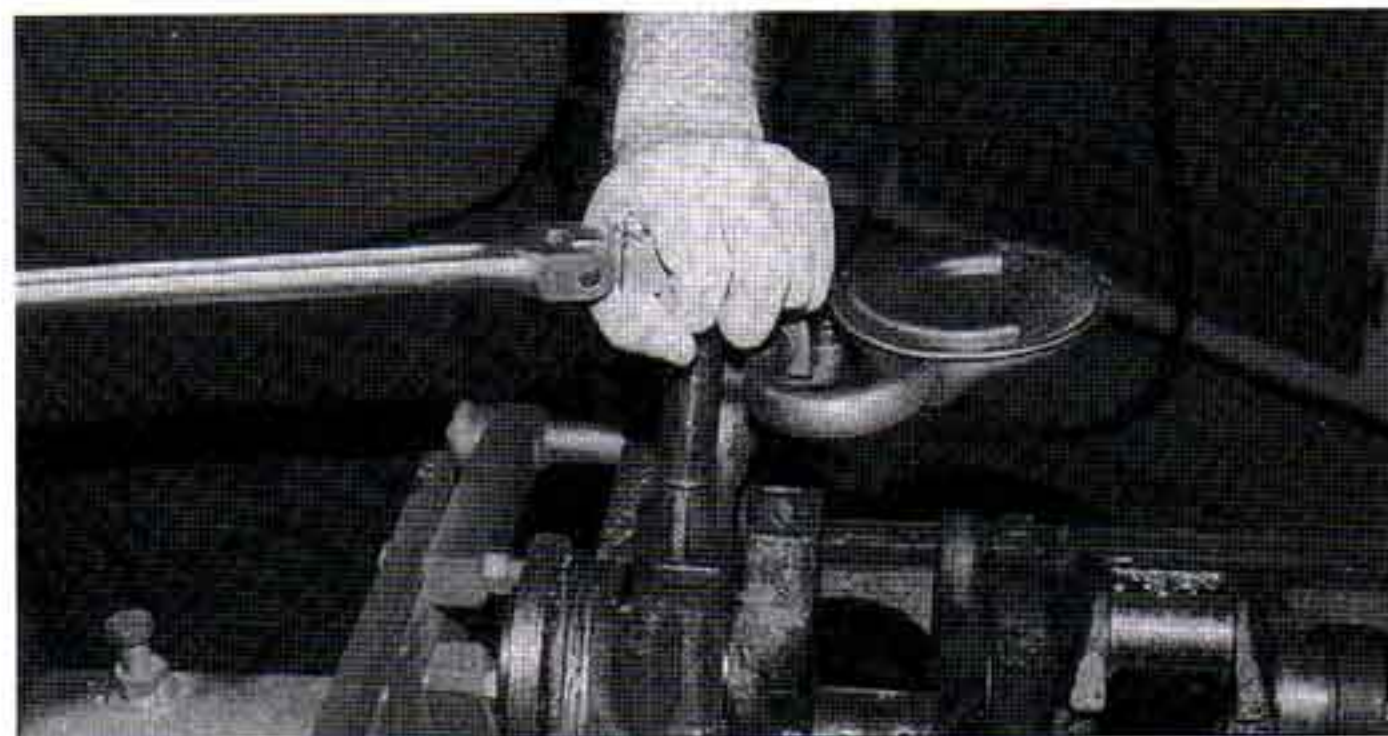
To replace the rear main seal, the oil pan will need to be removed. Drain the engine oil by removing the drain plug at the rear of the oil pan. Unbolt the idler arm bracket from the frame and lower the center link. Next remove all oil pan bolts. Using a putty knife or gasket scraper, remove the oil pan from the bottom of the engine. To access the rear main seal, the oil pump and the rear main cap must be removed. The oil pump is bolted to the rear main cap with one 5/8" bolt.
